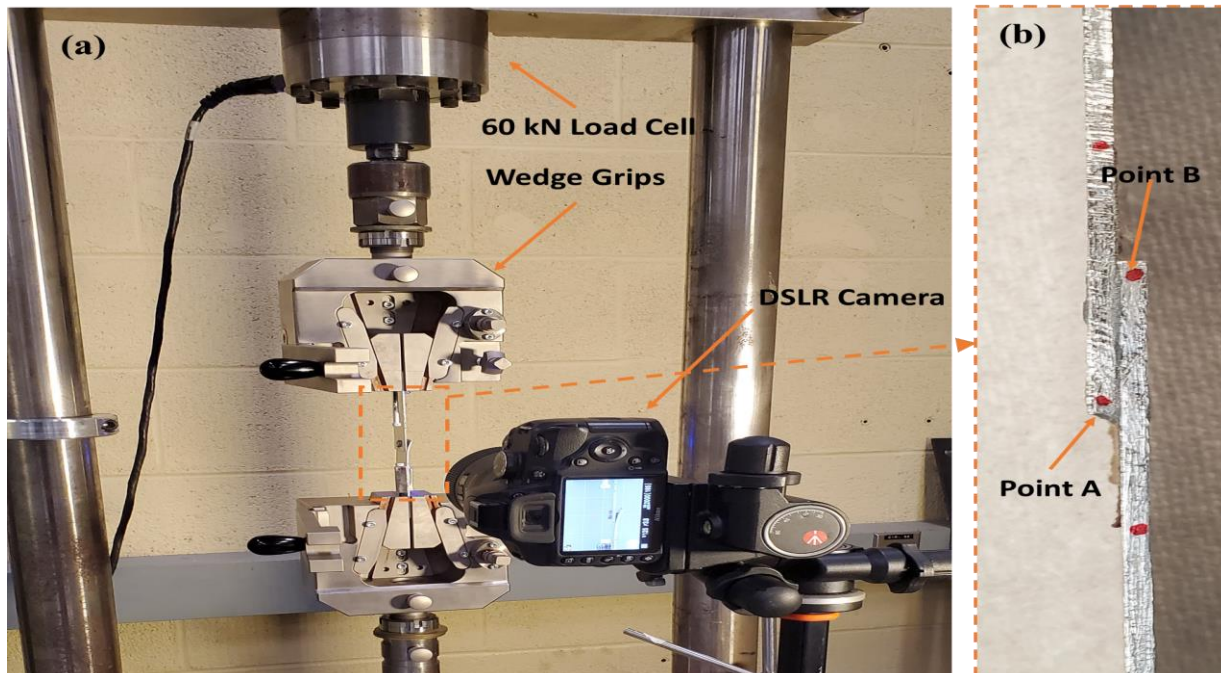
(a) Test setup for the tensile testing of adhesive, SPR and hybrid joined SLJ specimens and (b) the optical tracking targets on the side of the SLJ specimen.
